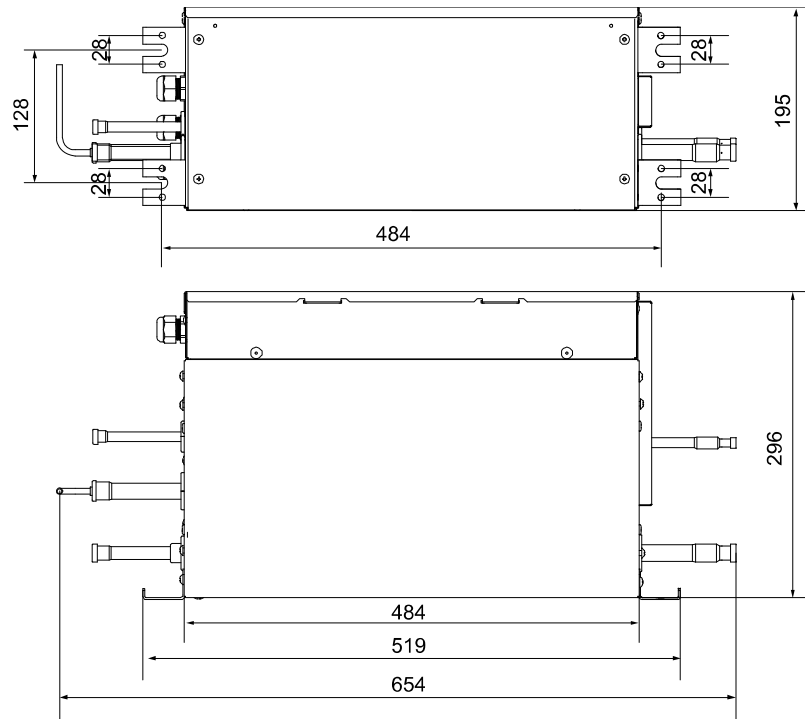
Ceiling-suspended type MS01 dimensions (unit: mm)
